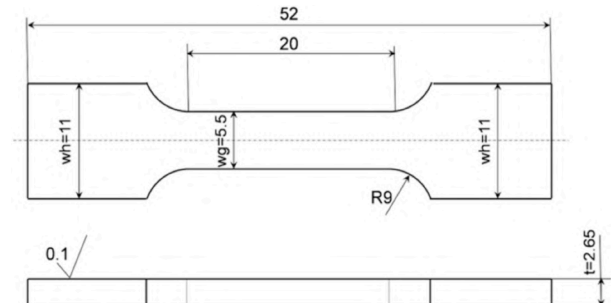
Drawing of the samples used in fatigue tests. Dimensions are expressed in mm.
